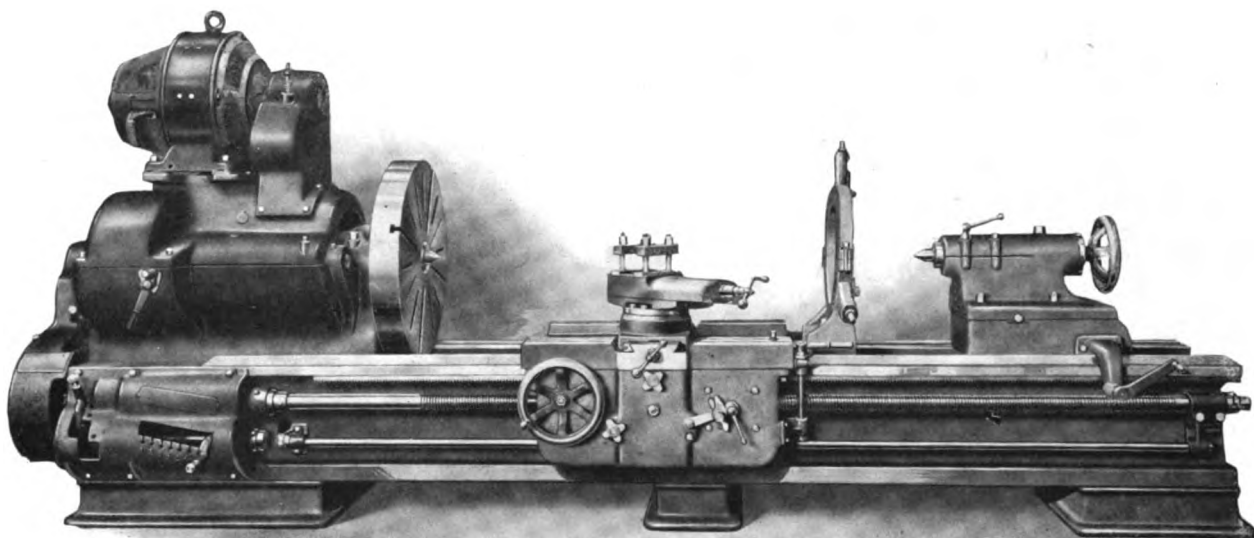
Pittsburgh Thirty-Six Inch Double Front Geared Lathe
